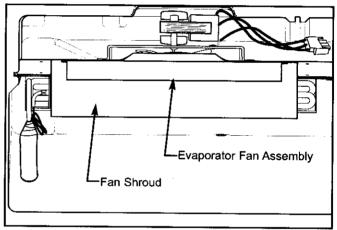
Top View of 700BCI-3 & 700BFI-3 Evaporator Fan Assembly in Sump
